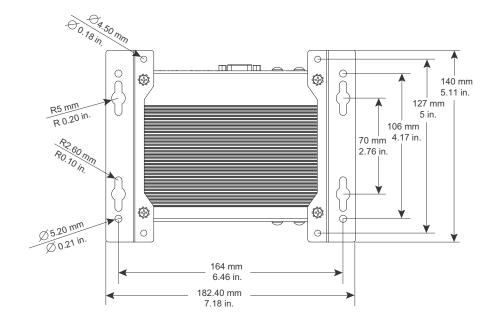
NC-E Series B Node Controller Surface Mounting Dimensions
